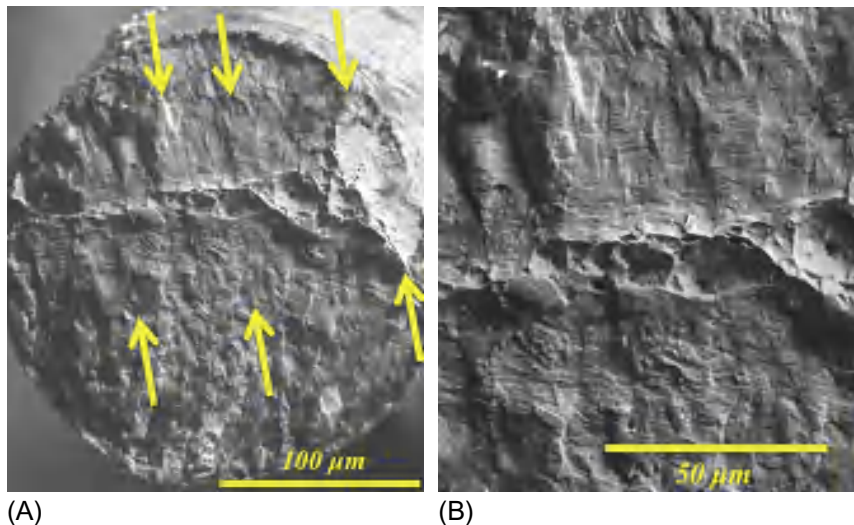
(A) SEM image of 316LVM annealed machined with femtosecond laser, fractured in flex bending fatigue after 4819 cycles. Crack growth direction is top-to-bottom and bottom-to-top. (B) Higher magnification of (A) [34].
